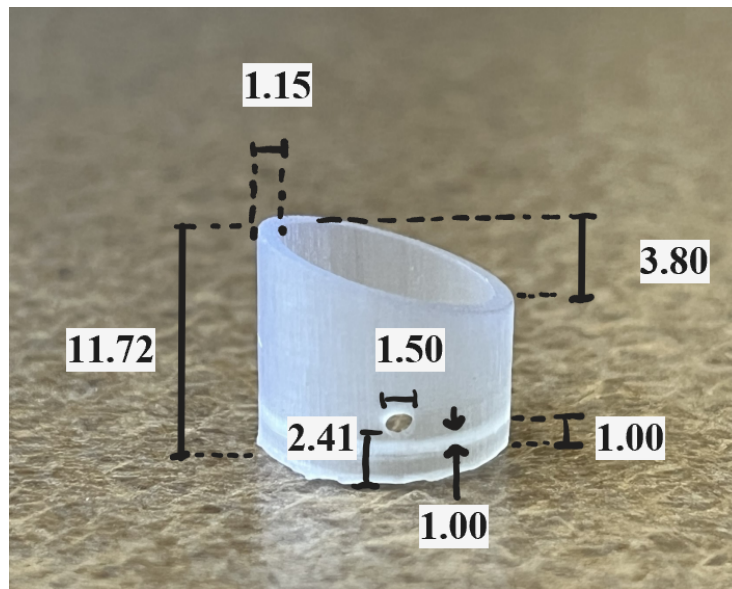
Polycarbonate section left view (dimensions in millimeters)
